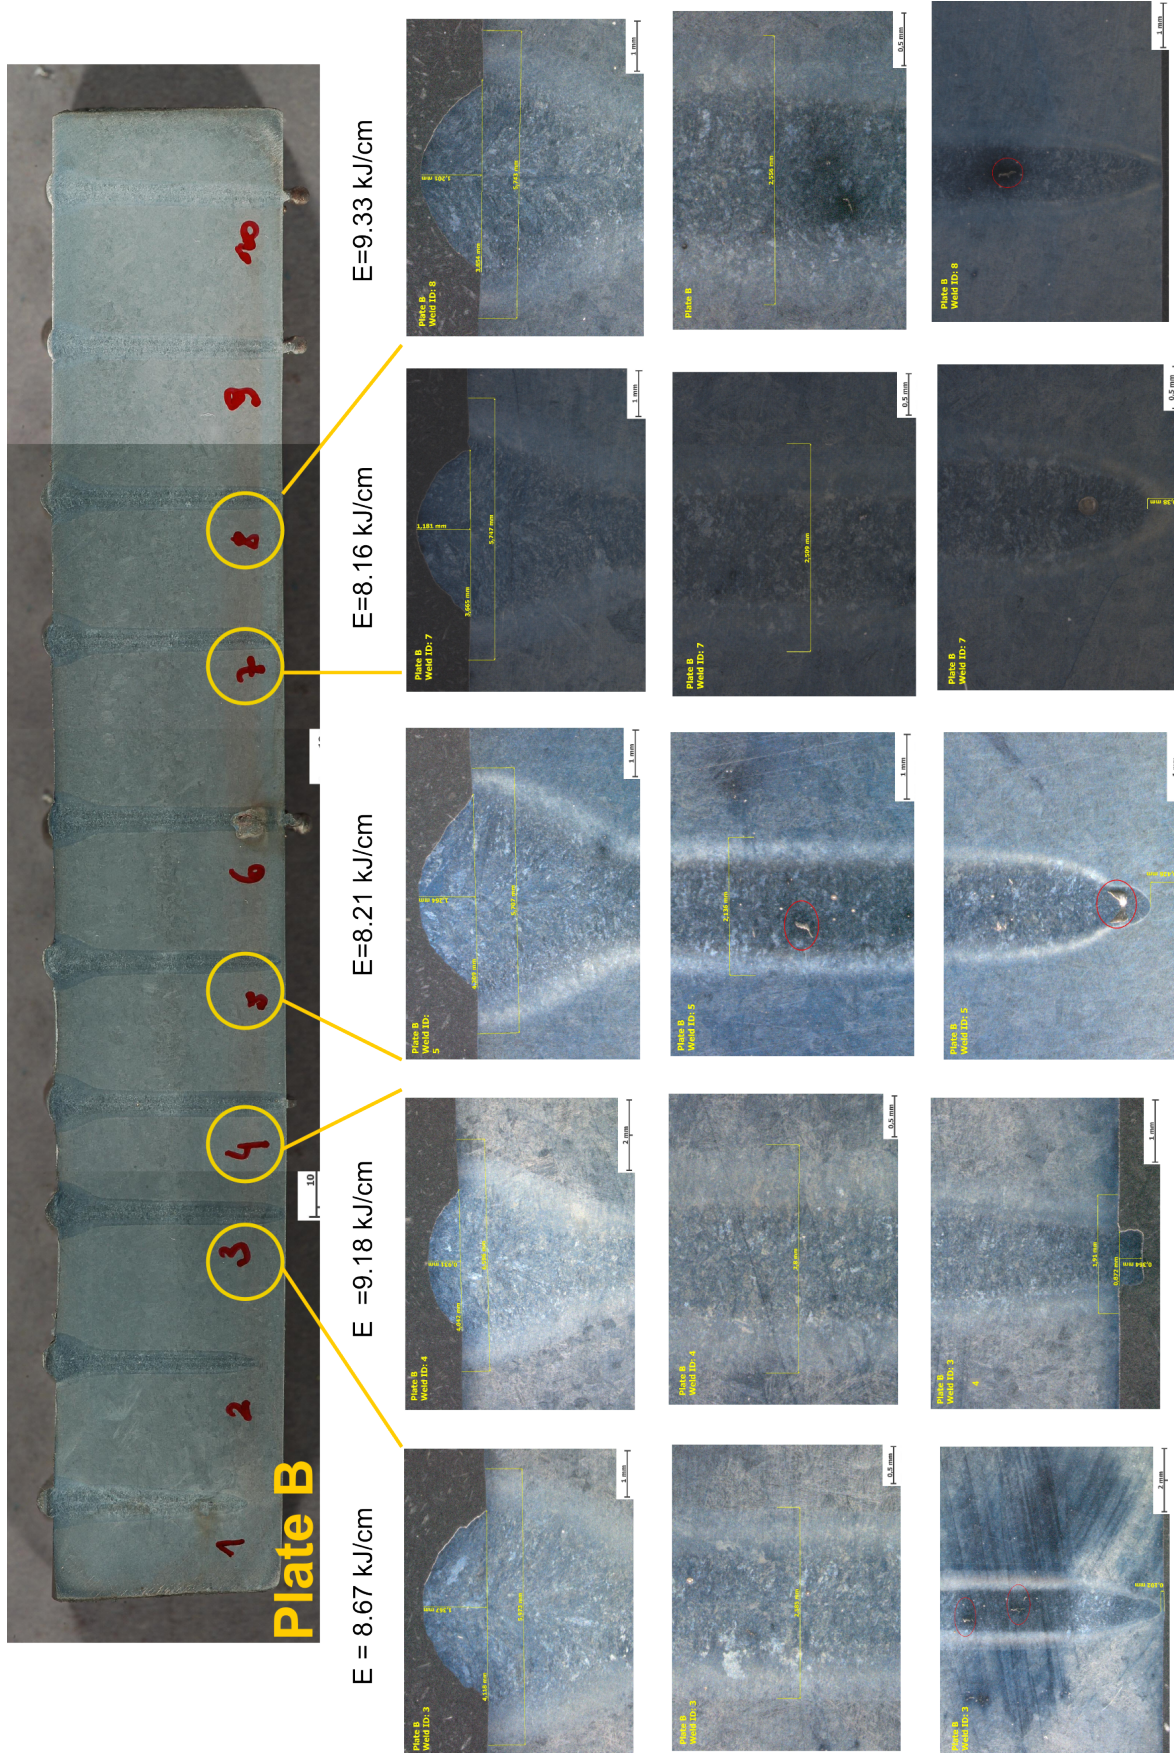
Selection of blind weldments of material test plate and their macrographs
